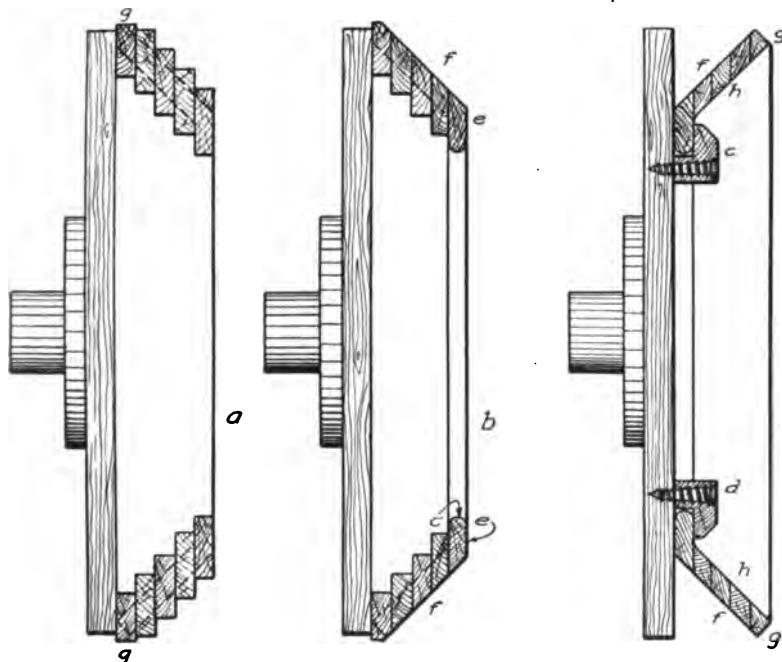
Large Bevel and Miter Gears Constructed of Built-Up Stock and Turned on Faceplate
